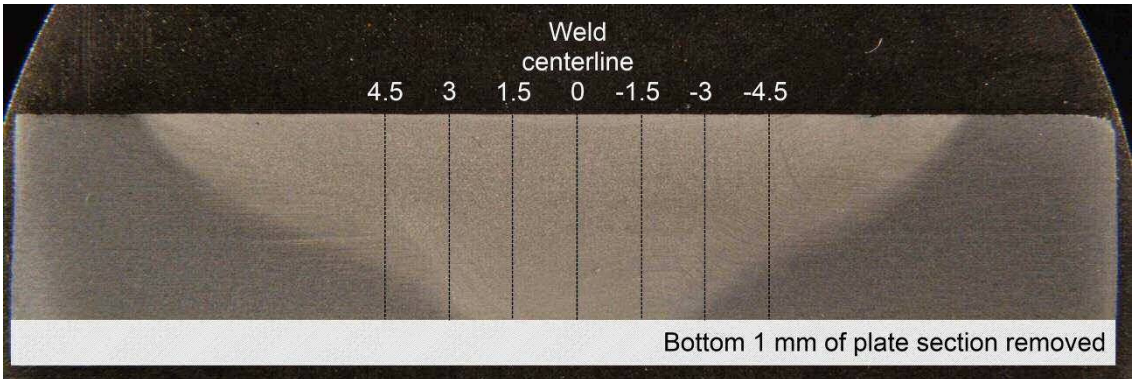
Typical macro-graph showing the position of the notch axis of symmetry of the seven Charpy samples examined from each weld.
